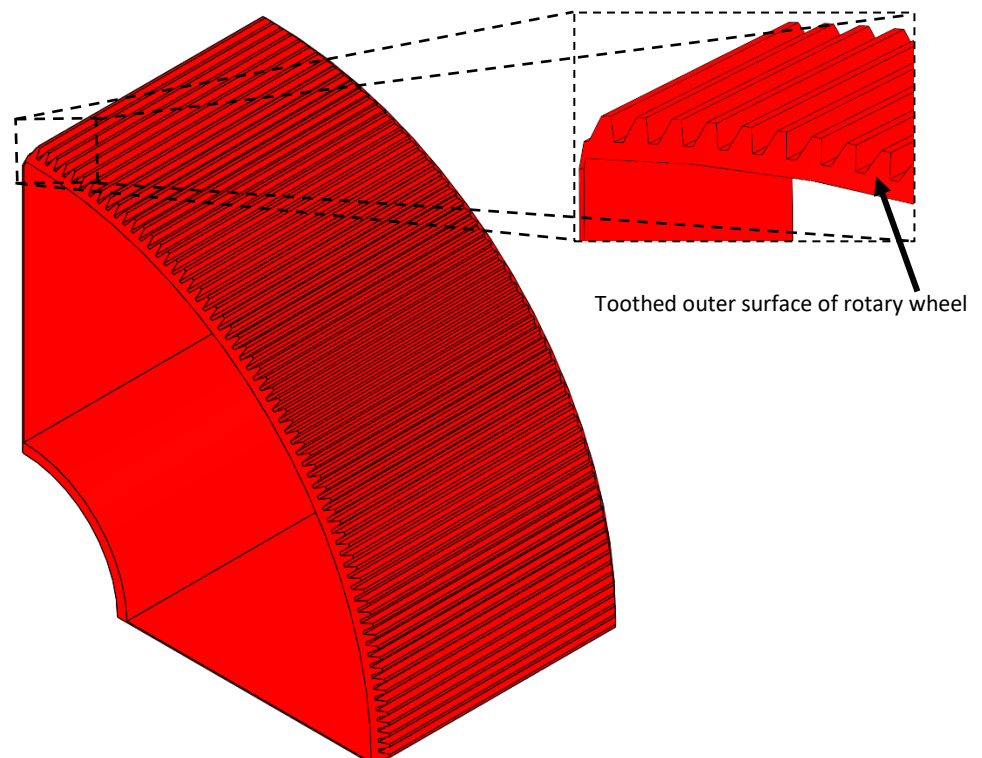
Outer rotary wheel configuration including close up of toothed outer shape for rotation by gear
